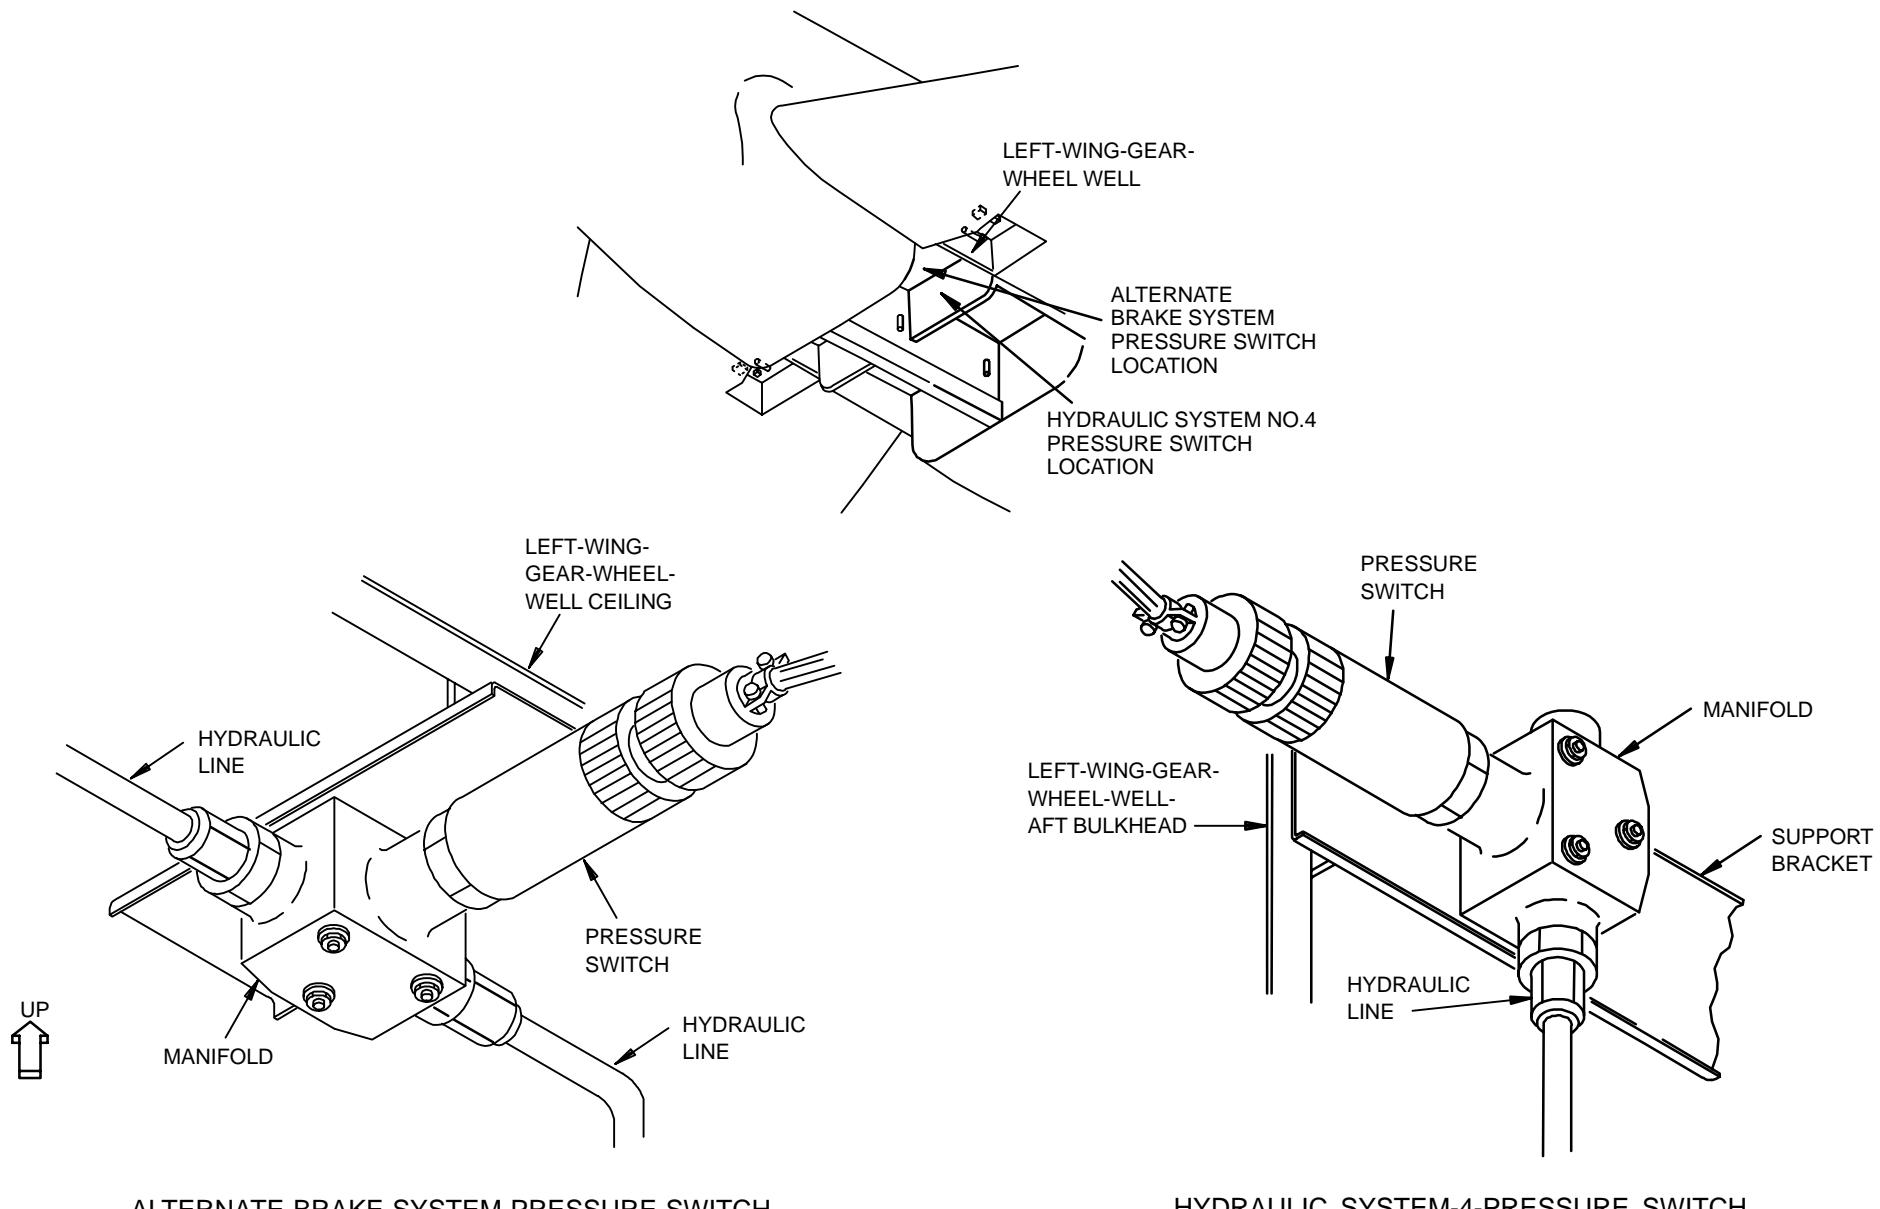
HYDRAULIC BRAKE SYSTEM PRESSURE SWITCHES
